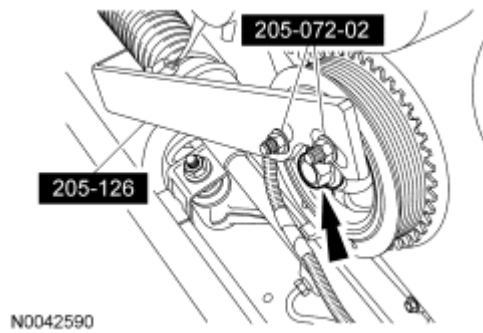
Locating Crankshaft Pulley Bolt
